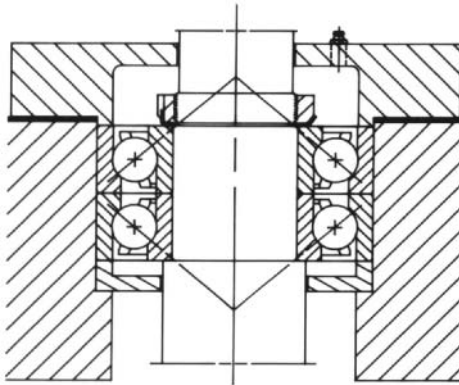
Vertically mounted thrust bearing arranged for grease lubrication (SKF USA, Inc.)
